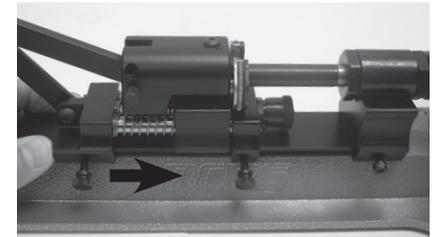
Slide Shell Holder Carrier Assembly to Cutter Shaft
